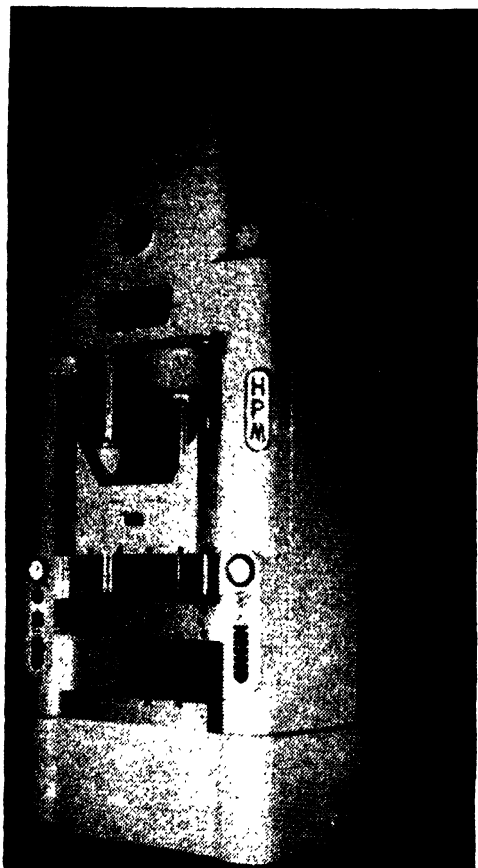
Triple-acting oil hydraulic drawing press. (*The Hydraulic Press Mfg. Co., Mount Gilead, Ohio.*)
